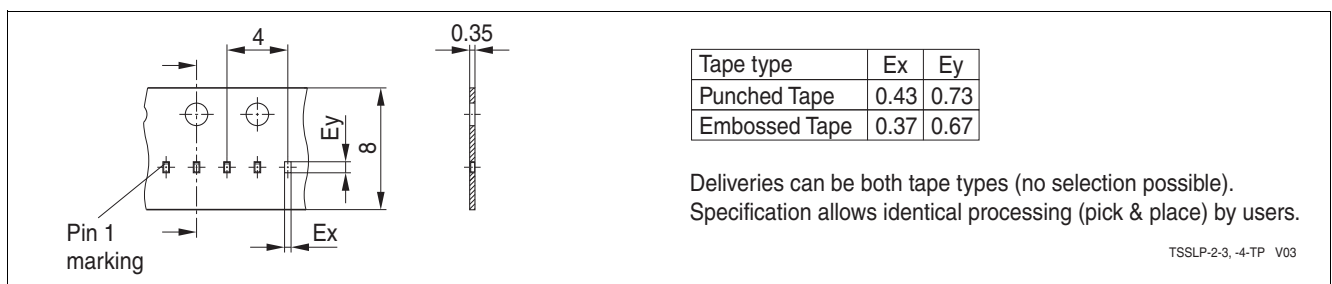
TSSLP-2-3 Packing (dimension in mm)
